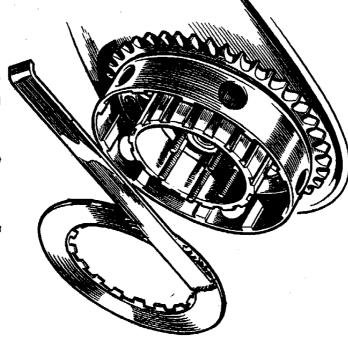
TOOL FOR CLUTCH-NUT REMOVAL
